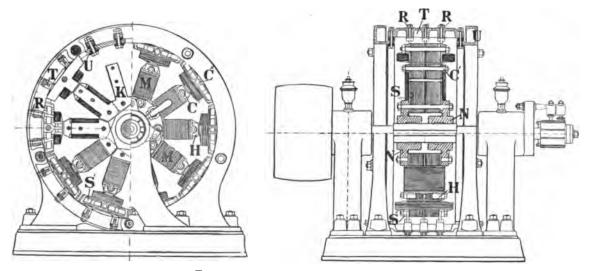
ZIPERNOWSKY ALTERNATOR.
